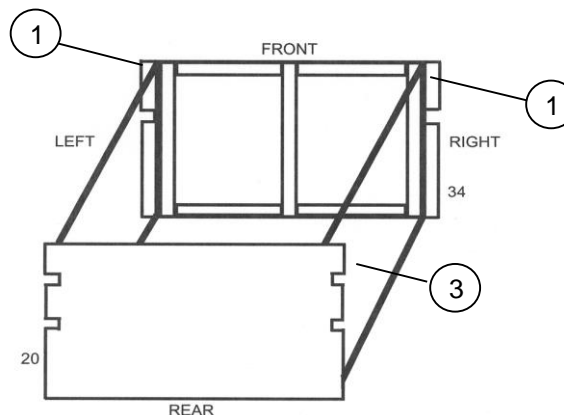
Equipment box 3 sides, top and bottom constructed
